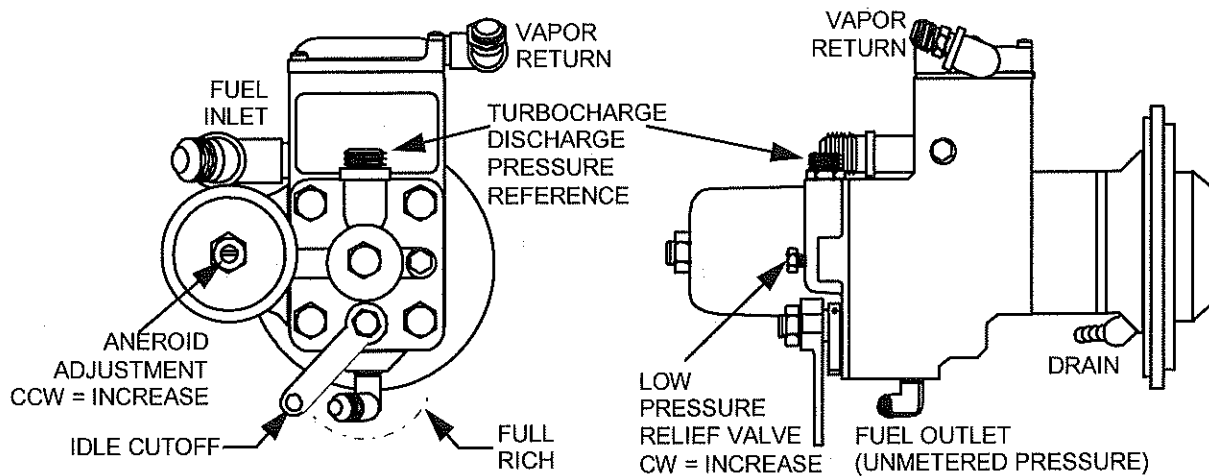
ANEROID & MIXTURE CONTROL EQUIPPED FUEL PUMP TURBOCHARGED ENGINE
